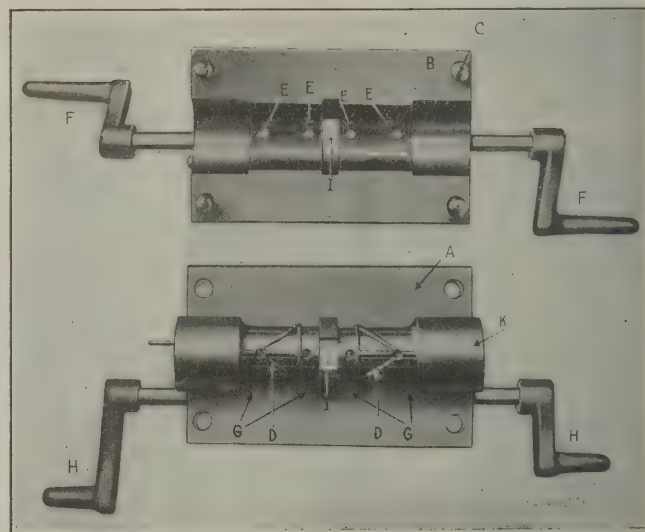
Die used by H. H. Franklin Mfg. Co. for Producing Bearings by the Die-casting Process
